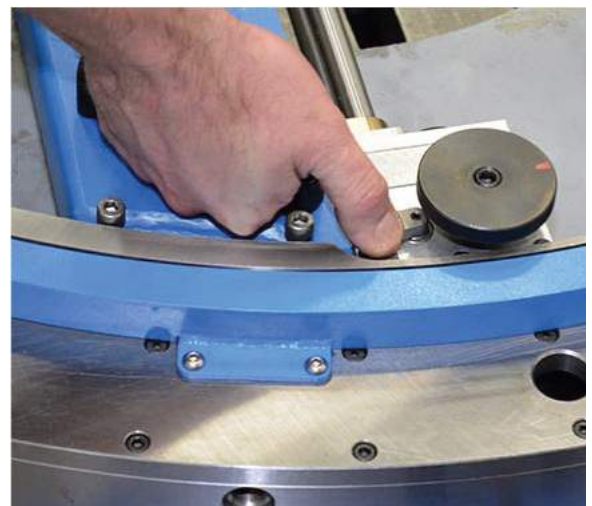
HOLDING CAM RELEASE KEY WHILE INSERTING (FF3600 SHOWN)
